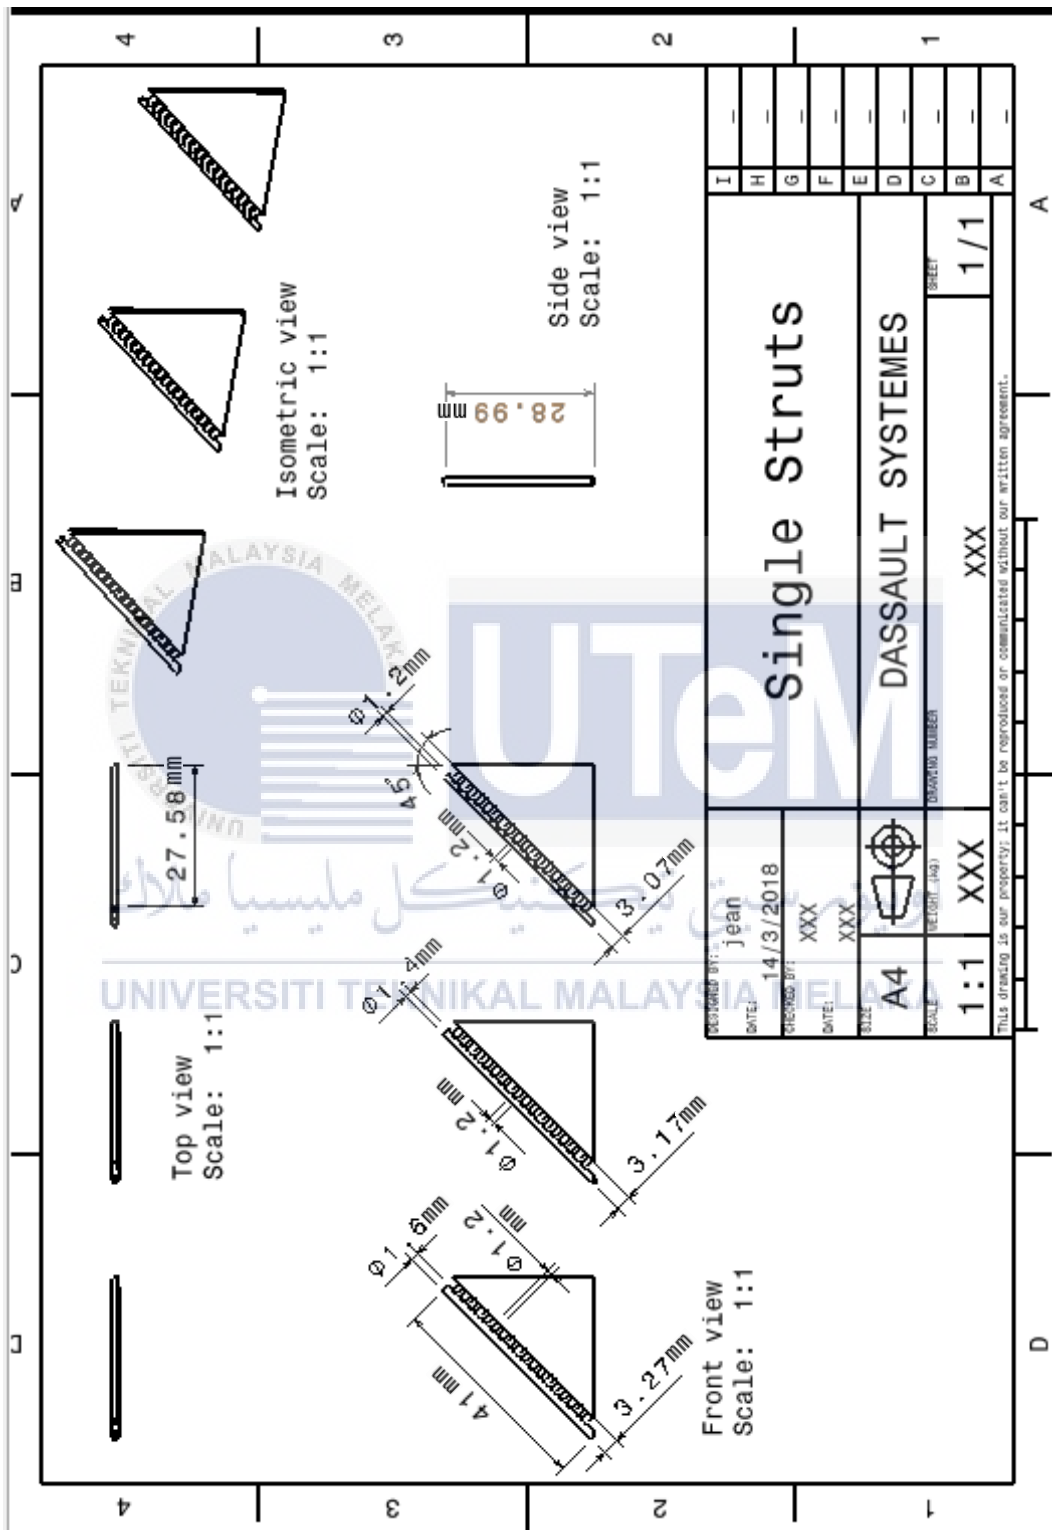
The dimension drawing of single struts with 45° using CATIA.
